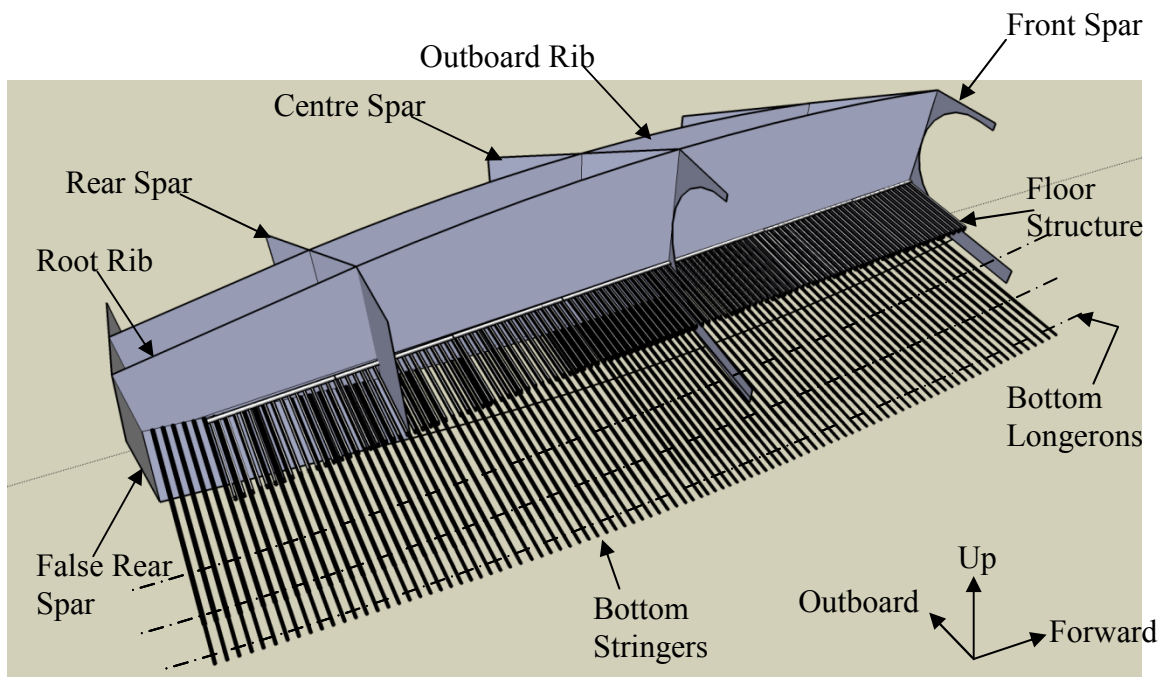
Model of proposed wing root design (Ribs, Spars and Bottom Stringers)
